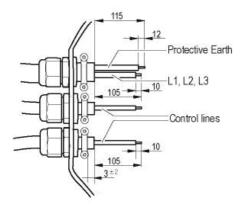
Recommended stripping lengths in mm (inside terminal box) for non-shielded cables. By way of example, all cable glands are used in this illustration. The illustration may differ from the actual device design.
